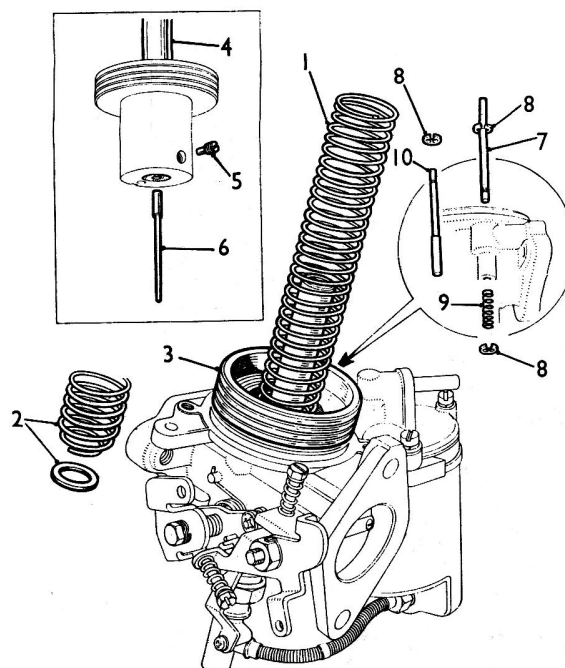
DISMANTLING THE HS6 CARBURETTOR - STAGE 2
